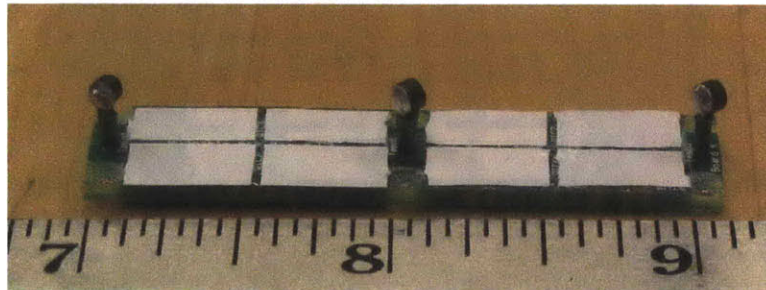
The Arm Sensor Circuit Board with Thermistors Mounted
